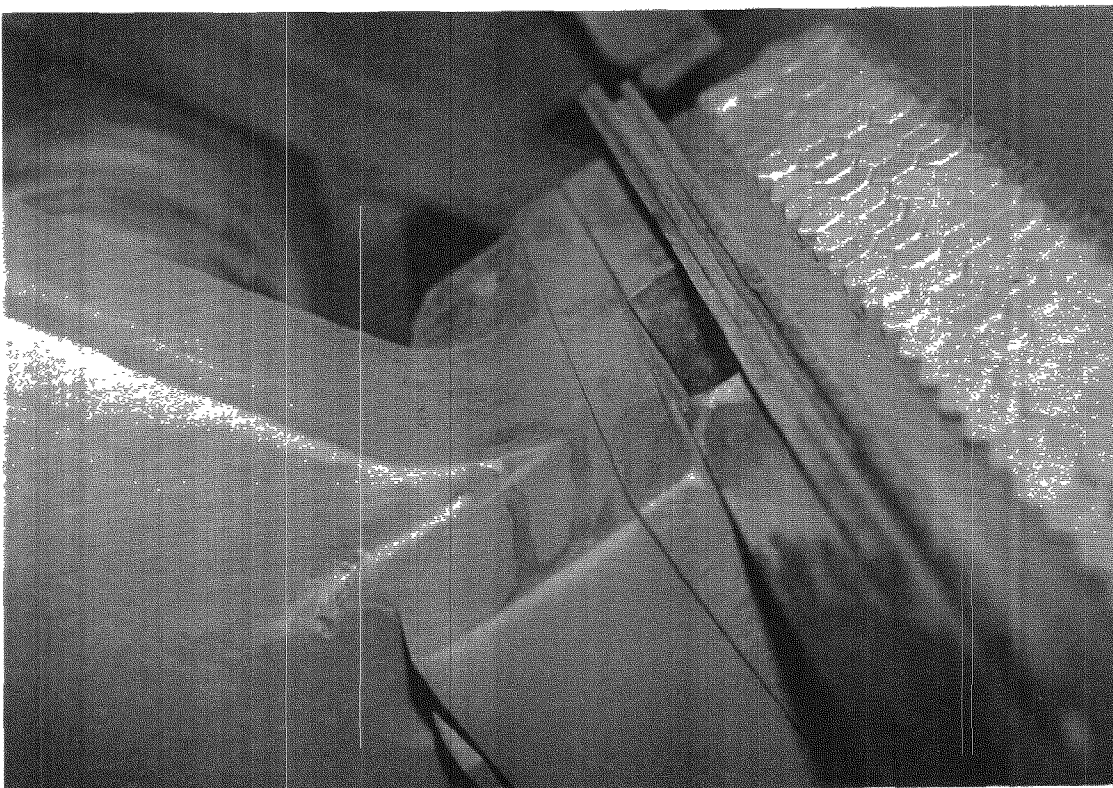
Piece of Housing Wear Plate Jammed in Throat Port
